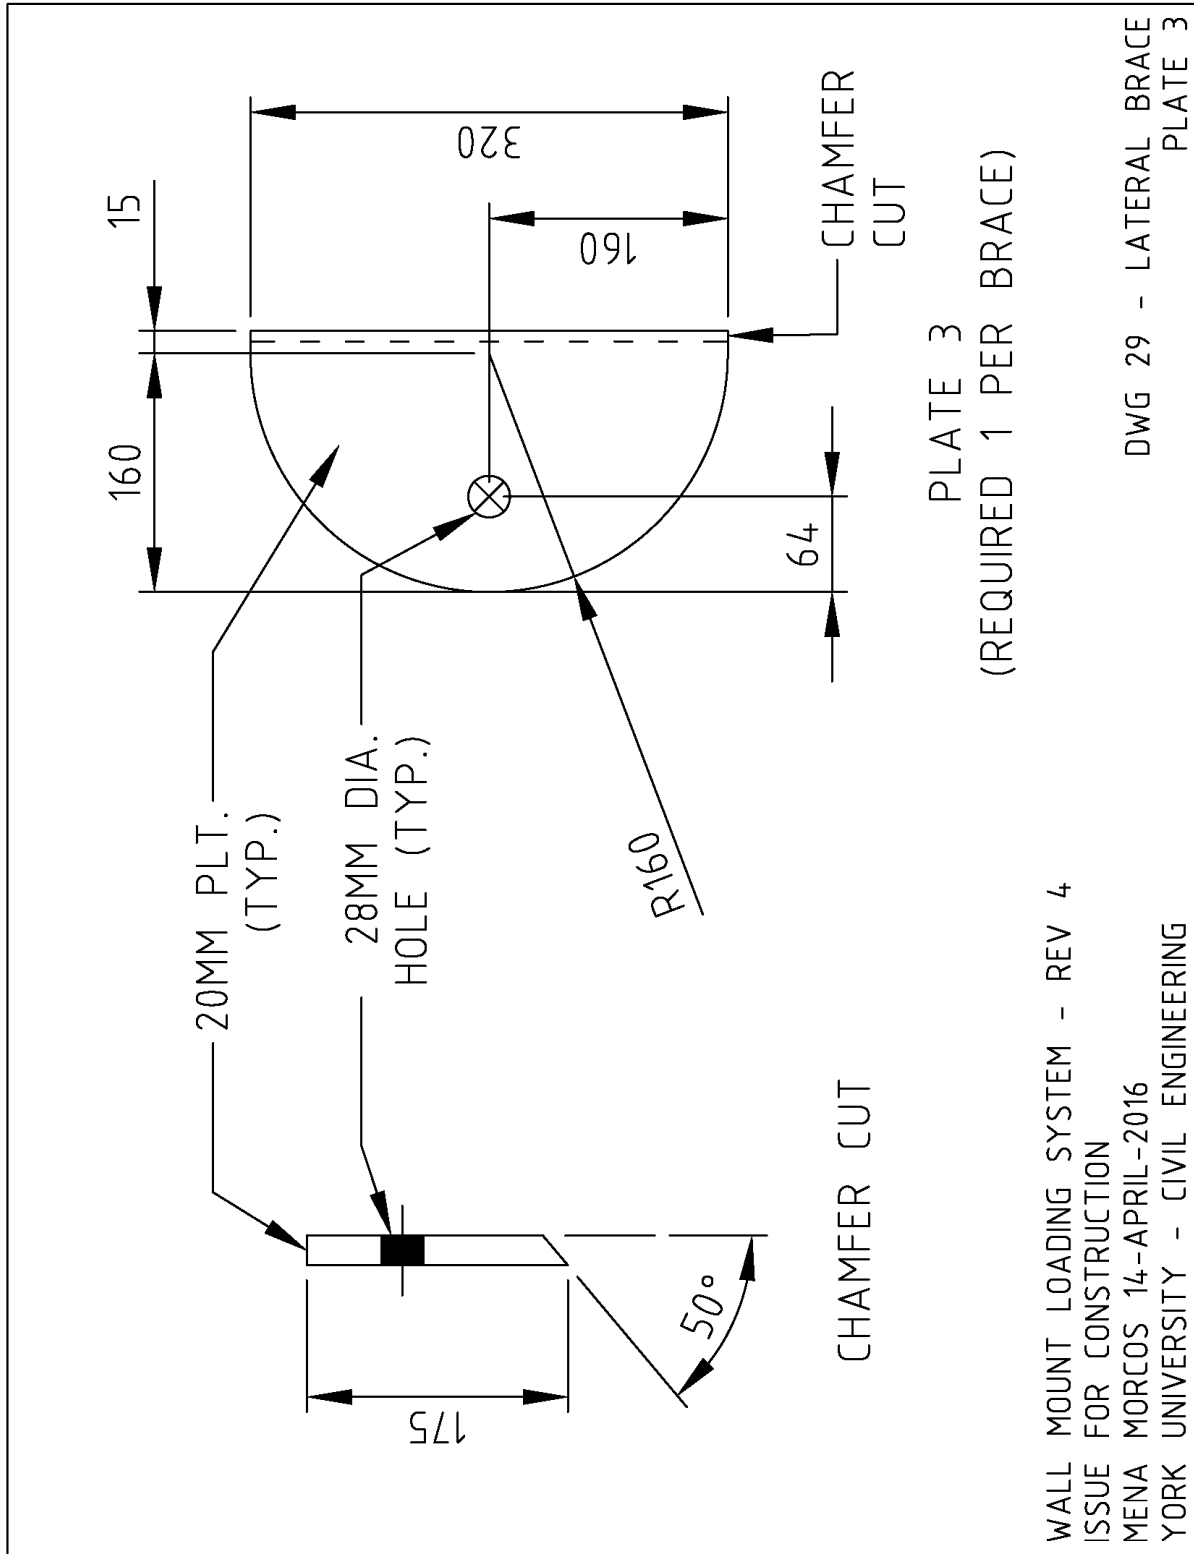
Wall mount loading system design and fabrication drawing – Drawing 29.
